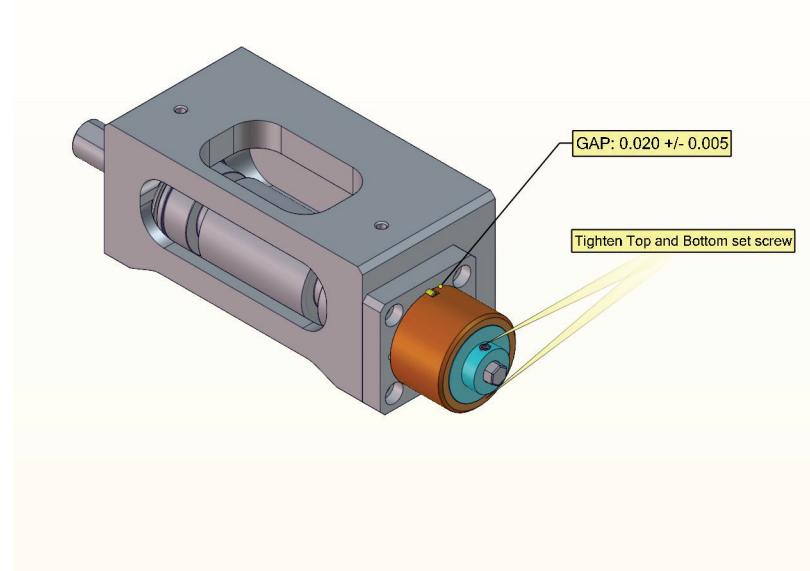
Installing the Drag Clutch with Proper Gap on Shaft
